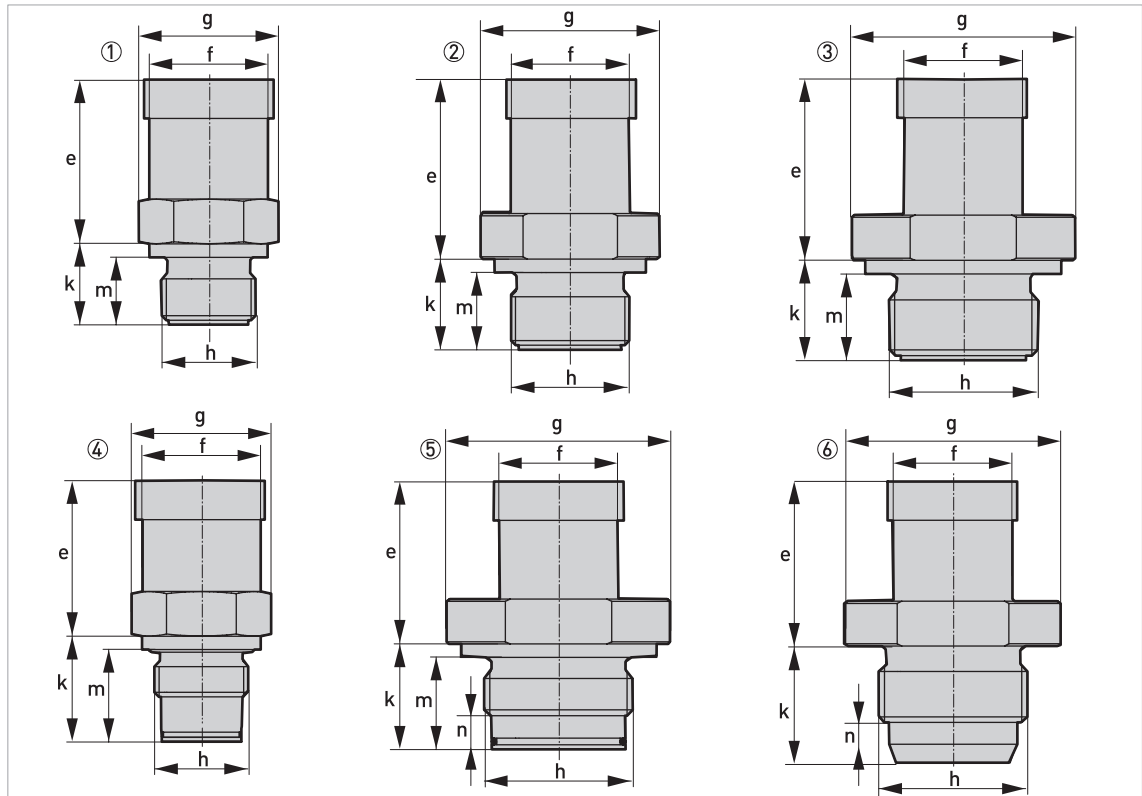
Dimensions for pressure transmitter with threaded connection
